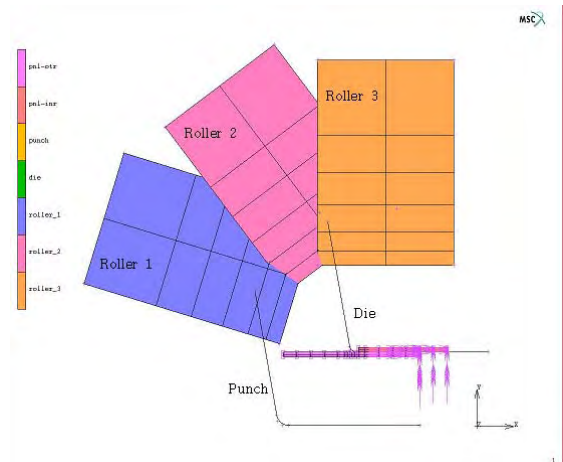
Punch and die set for flanging and rollers for the flat hemming.
